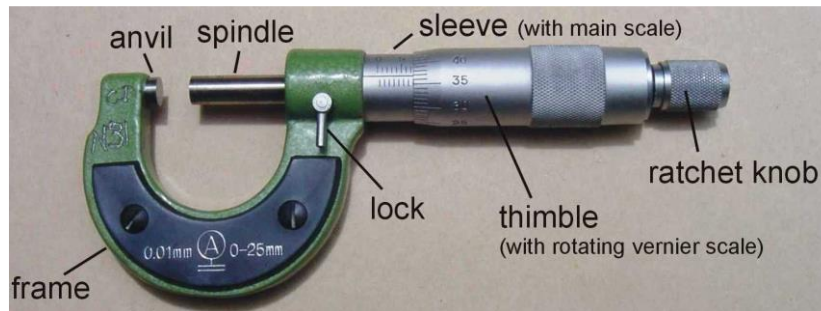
The parts of a screw gauge is shown labelled in figure above.
